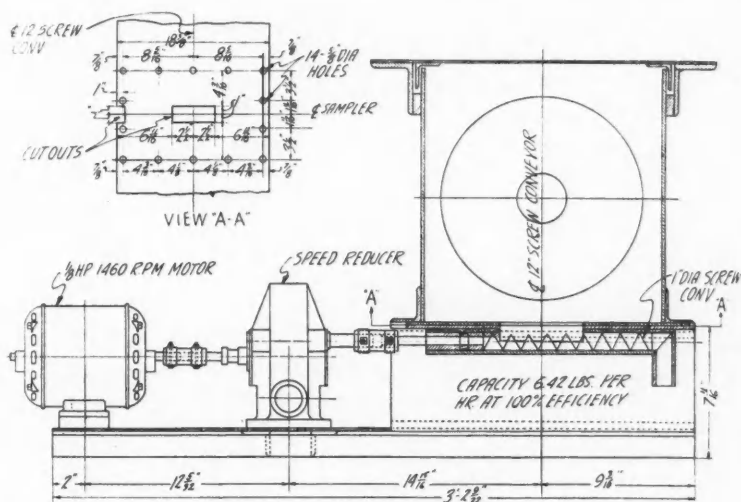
A 1-in. diameter Screw Sampler placed at right angles to a 12-in. Screw Conveyor.
